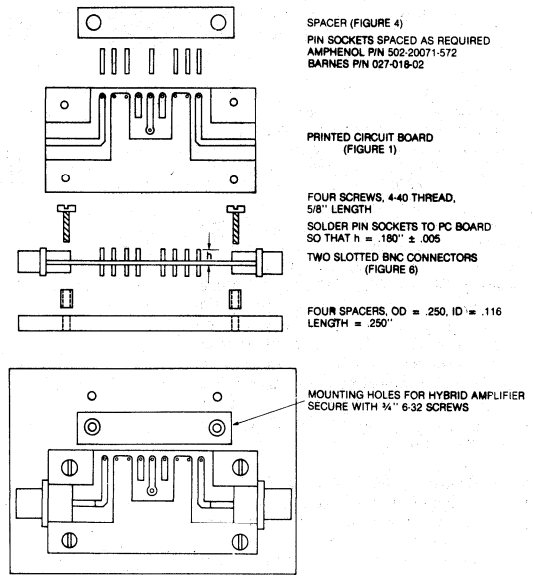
Text Fixture Assembly for Hybrid Amplifiers in Low Profile Package (Case 714G-01)
